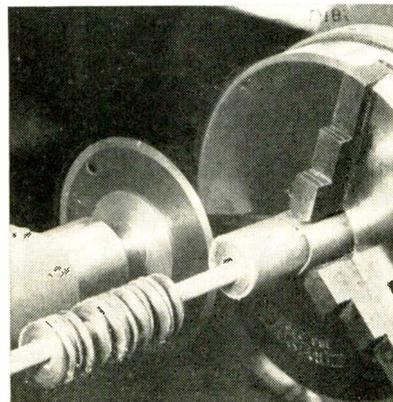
Concept of complete mechanized setup for producing transformers using wafer coils
